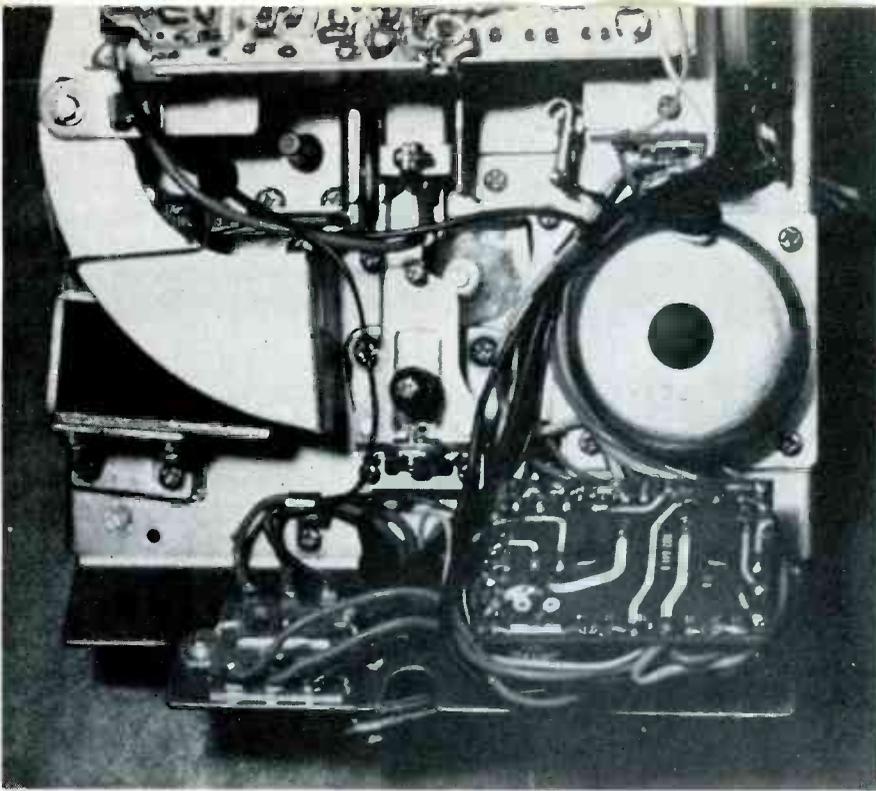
Photo of Craig Model 3125 electromagnet pinch-arm mechanism. Adjusting the position of the magnet allows the player to use off-brand tapes.
